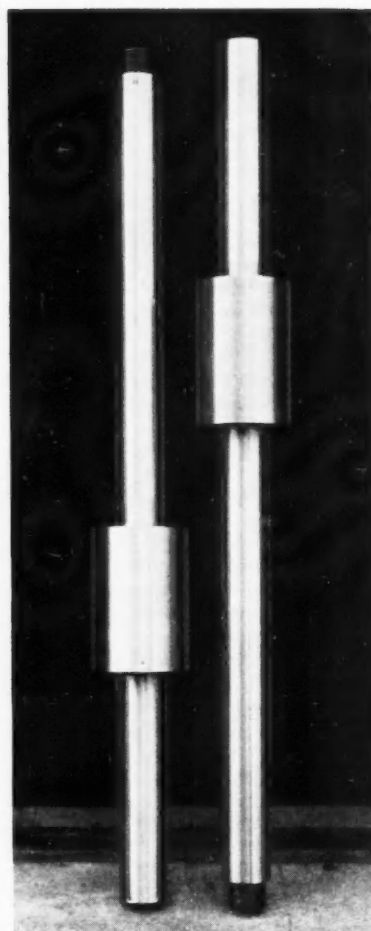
Audcoloy pump-spindles, showing the silvery machined finish
